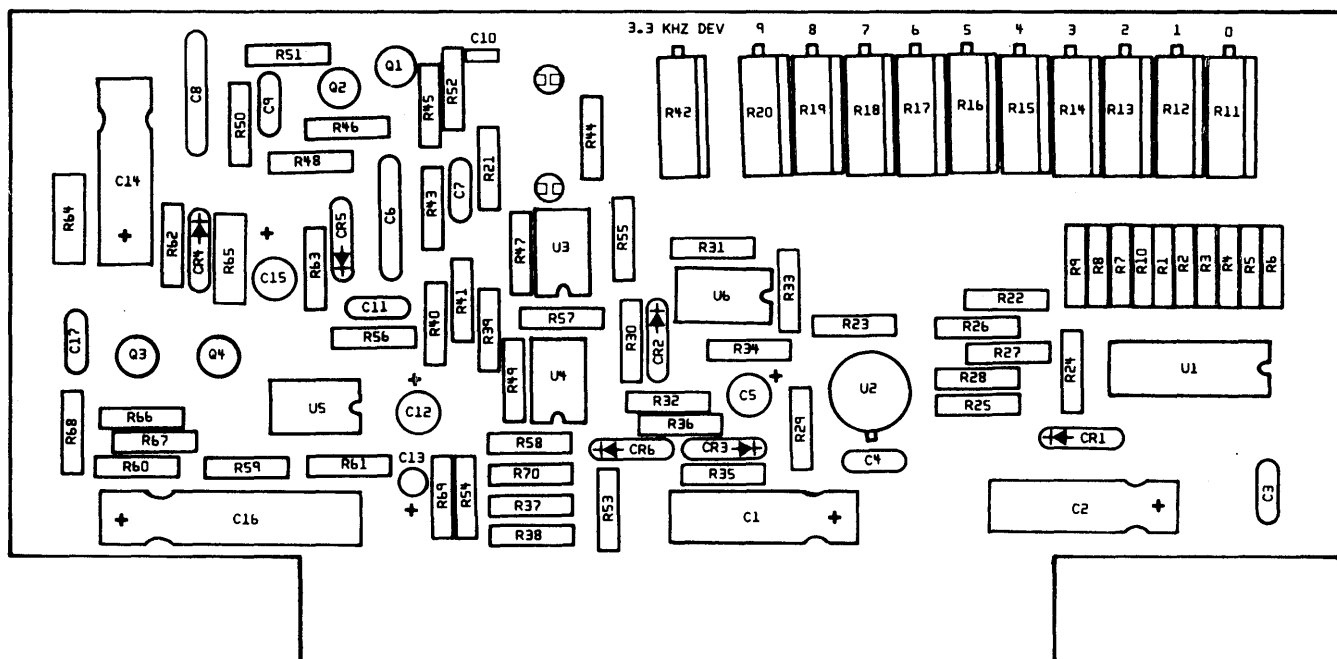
Audio Amplifier and Varactor Control Assembly.
